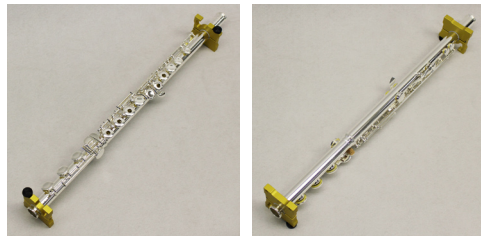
Rotating the Flute Blocks allows 360° access.
